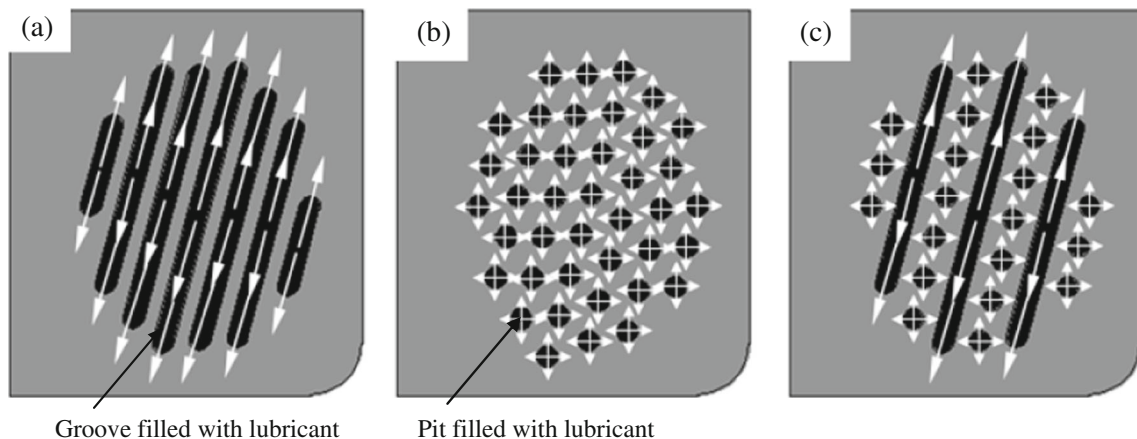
The lubricant motion due to squeezing, a GT tool, b PT tool, and c GPT tool
